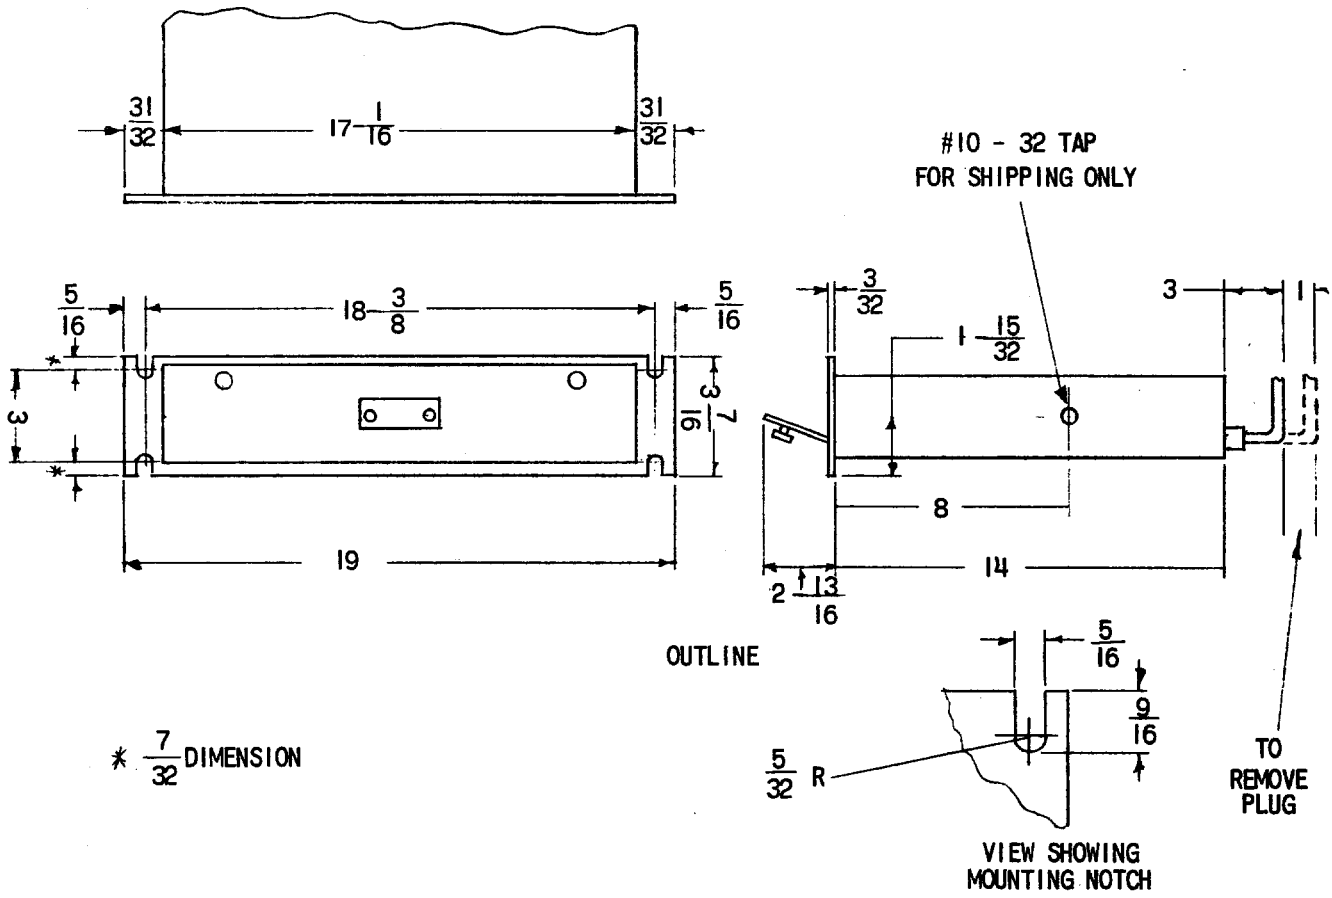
(0227A2036-0) Outline And Mounting Dimensions For The Type SLLP51A Relay
